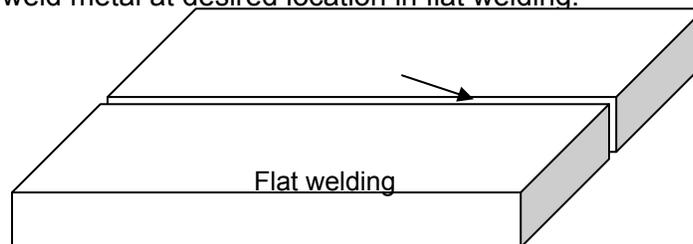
Scheme of placement of components to be welded for flat welding
